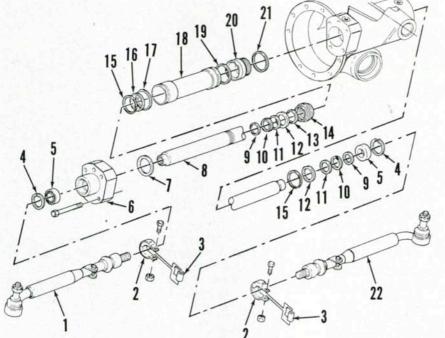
Exploded view of power steering cylinder used on late production (1987 and after) two wheel drive tractors.
